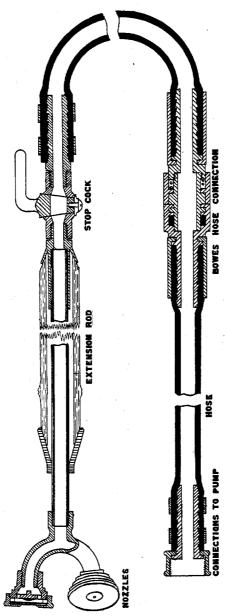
A good type of hose connections, hose, extension rod and nozzles.
